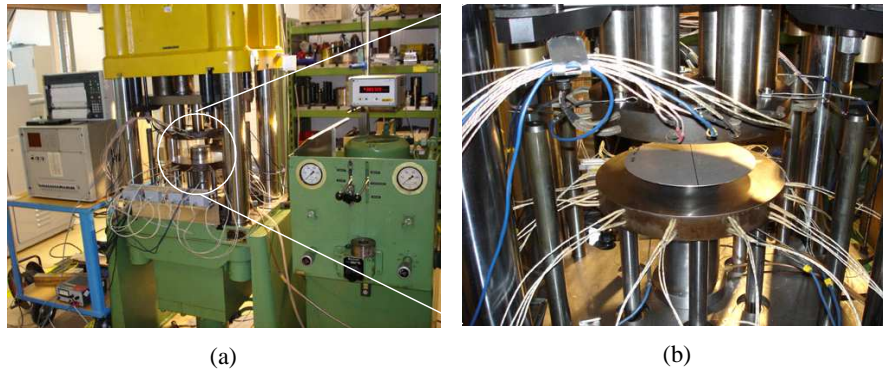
Picture of the applied tool set-up (a) overall view (b) tool set-up with blank, blank holder, die, punch and heating arrangements. The white wires are connected to the heating rods while the blue wires are connected to the thermocouples.
